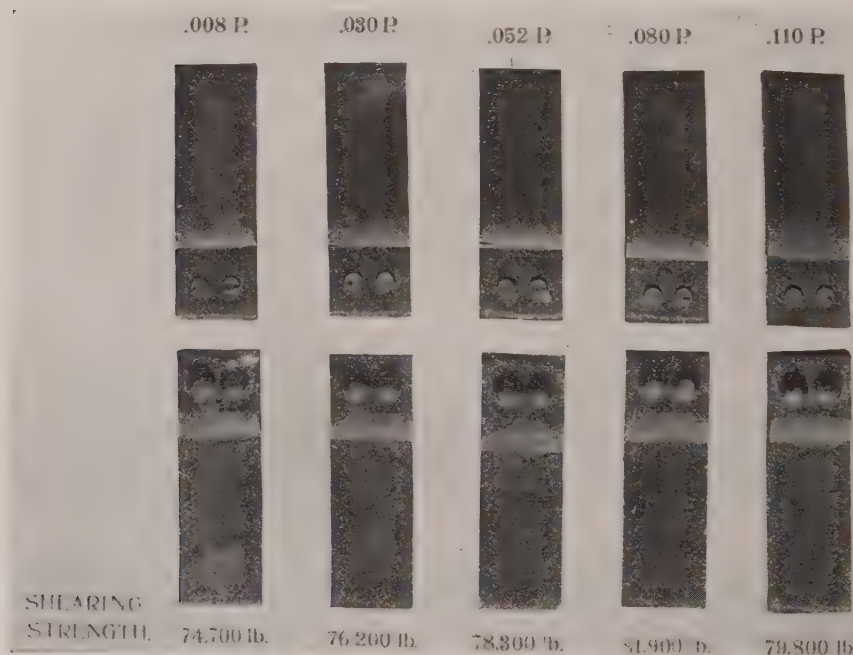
Shearing Test of One-inch Basic Open Hearth Riveted Joints
